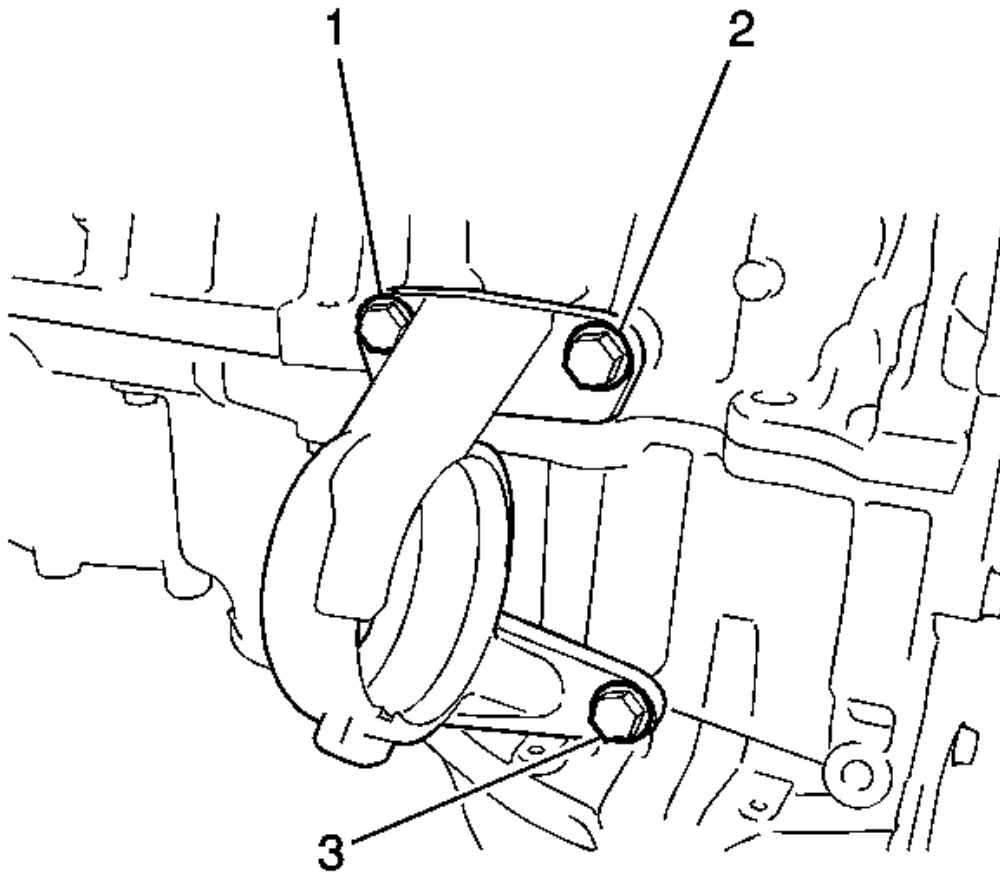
Identifying Drive Shaft Bearing Bracket - (2WD)
